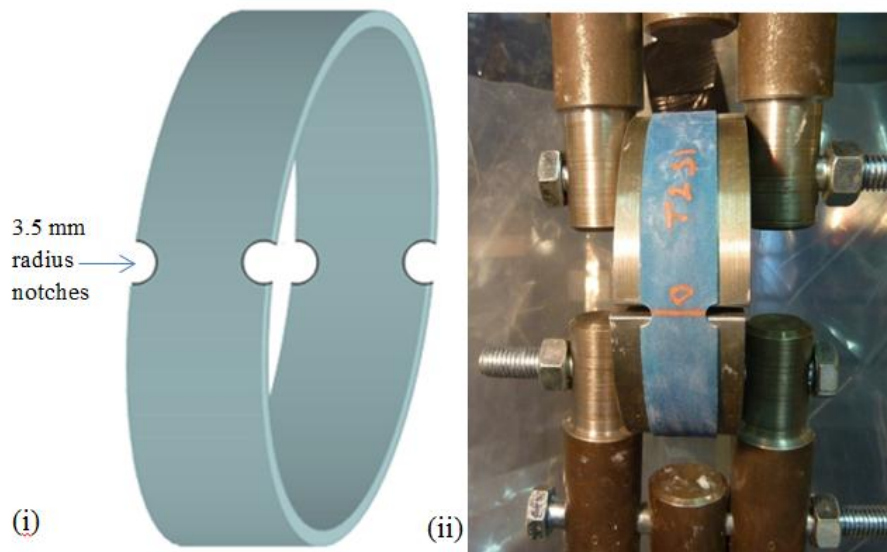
(i) A schematic showing the relevant notch locations on each of the hoop tensile specimen. (ii) A photograph showing a hoop tensile specimen loaded in the tensile rig on the Zwick 1484 mechanical test machine.
